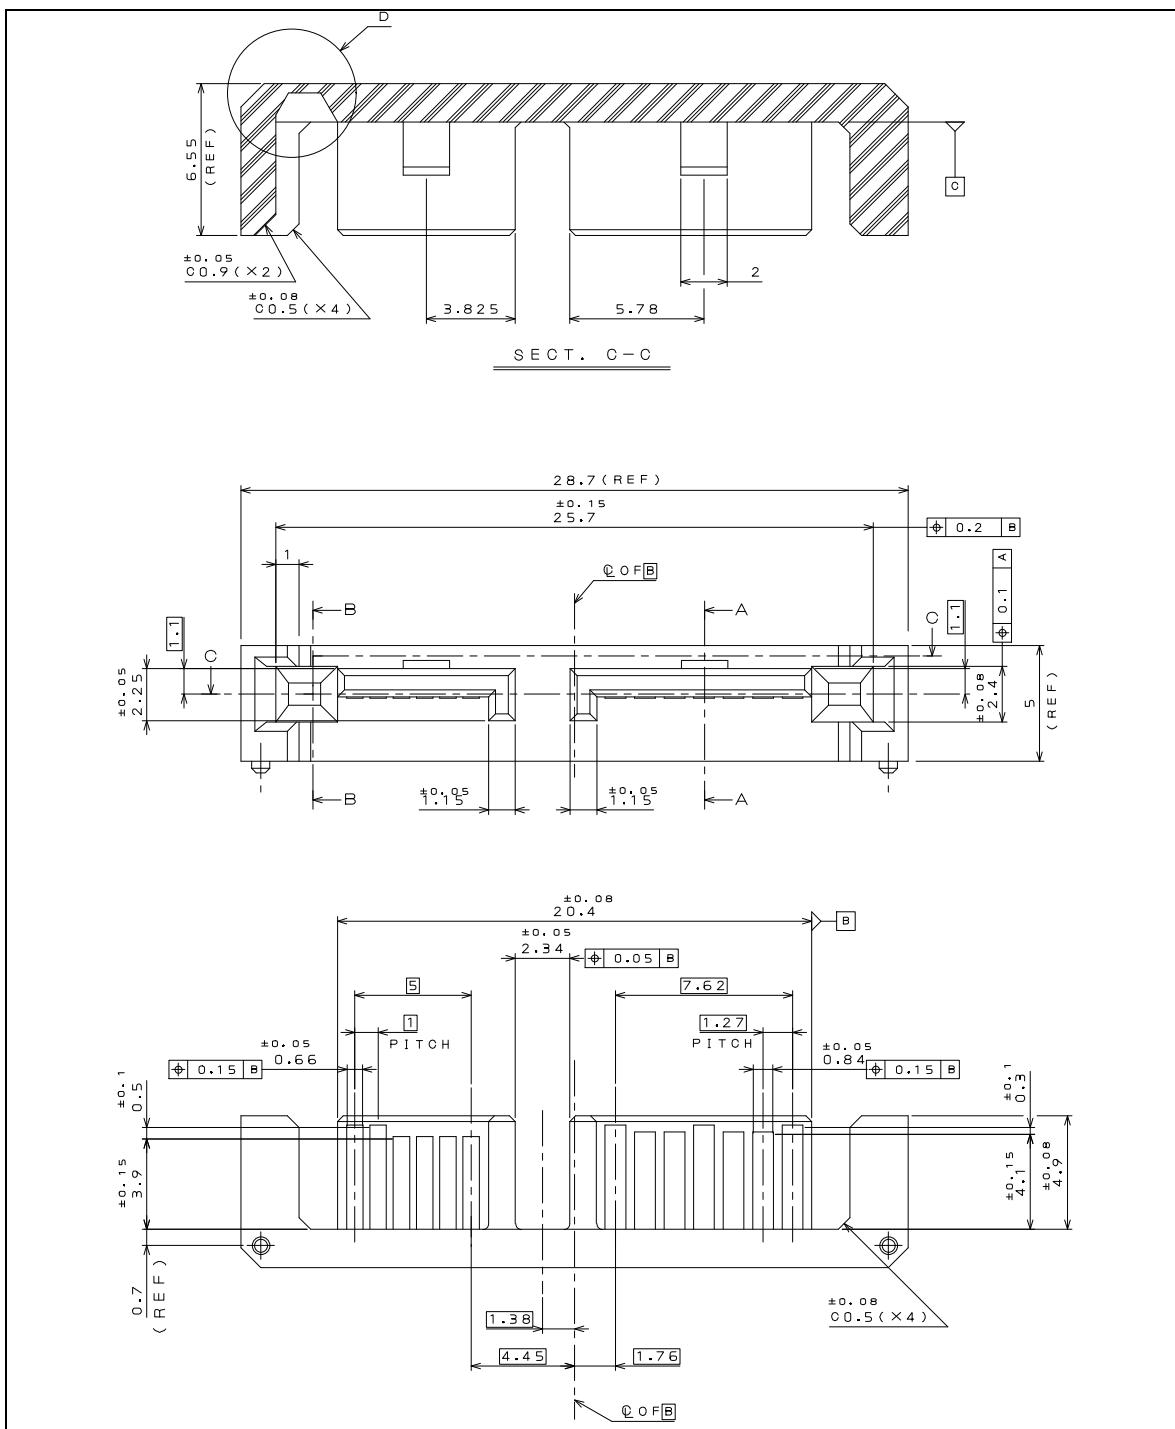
7 mm Slimline device plug connector interface dimensions
